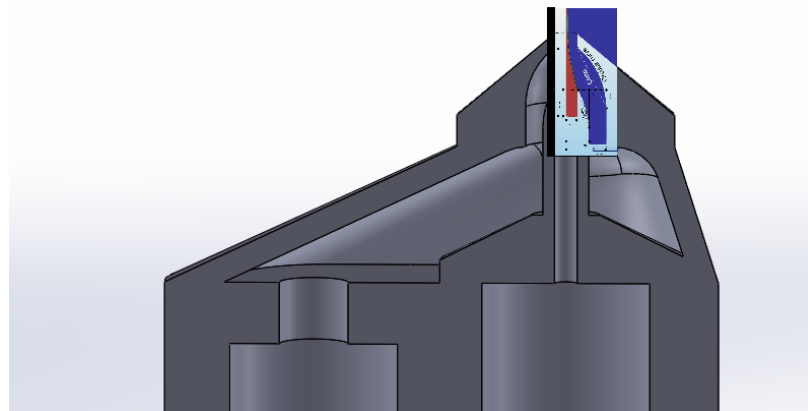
Design of the bell-shaped 3D printed GDVN cut into half.
